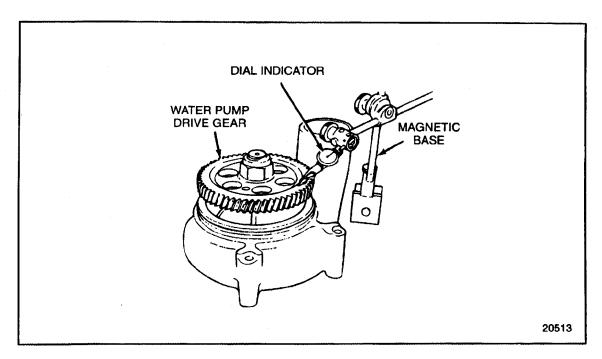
Measuring Water Pump Drive Gear Runout (FM)
